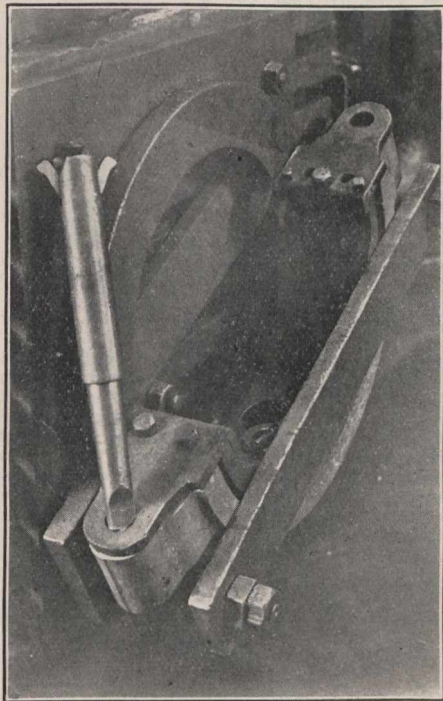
Jig for Holding Eccentric Straps while Recessing Babbit Holes.
